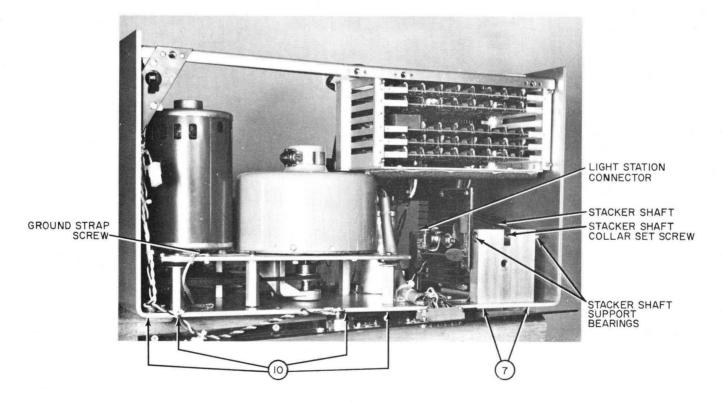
Rear View, Cover and Rear Connector Panel Removed
